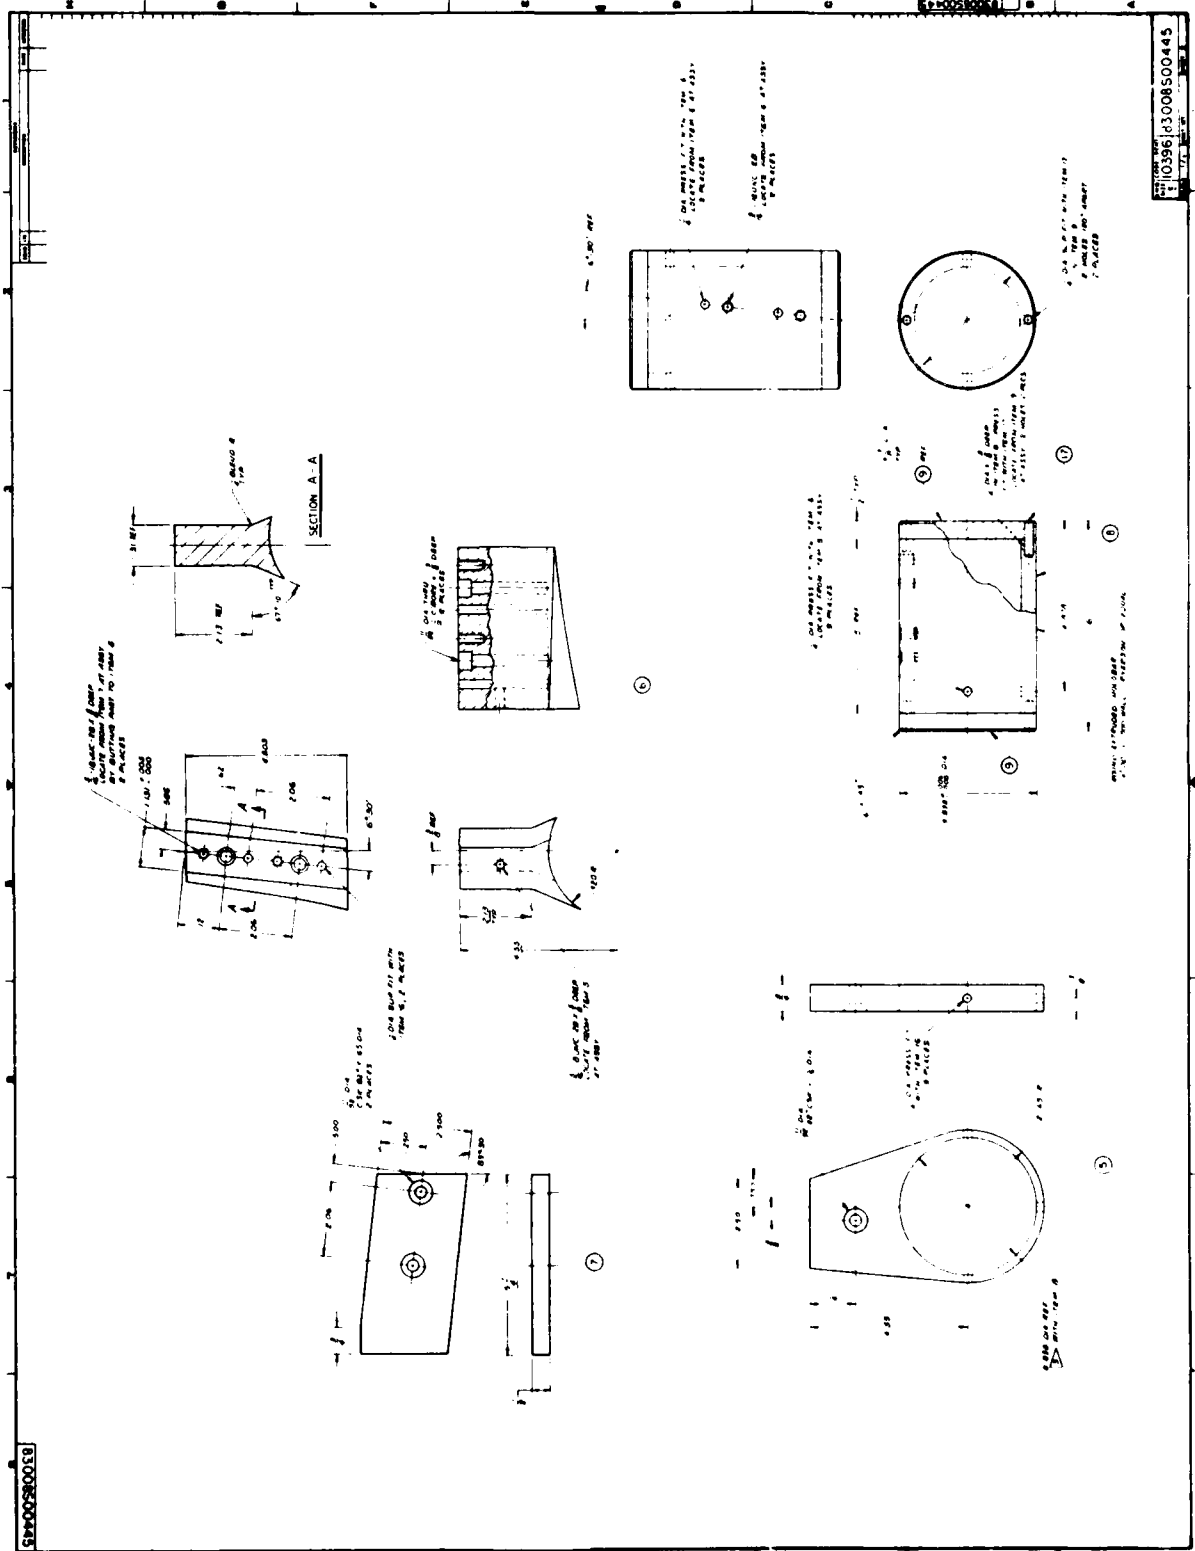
Layup Tool, Side Brace Attachment, Drawing 83008S00445
